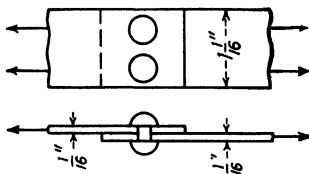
Lap joint, dural straps. Two $\frac{1}{8}$ in., 2S rivets, driven cold.
